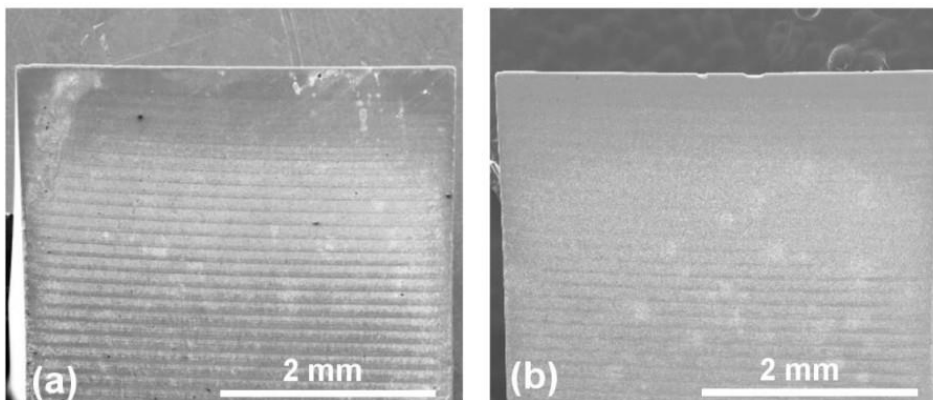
Typical aspect of the cutting edge of carbide tips (clearance face view) after 900 min of sawing at 70X magnification: (a) with up-sharp tips, and (b) with waterfall hone tips
